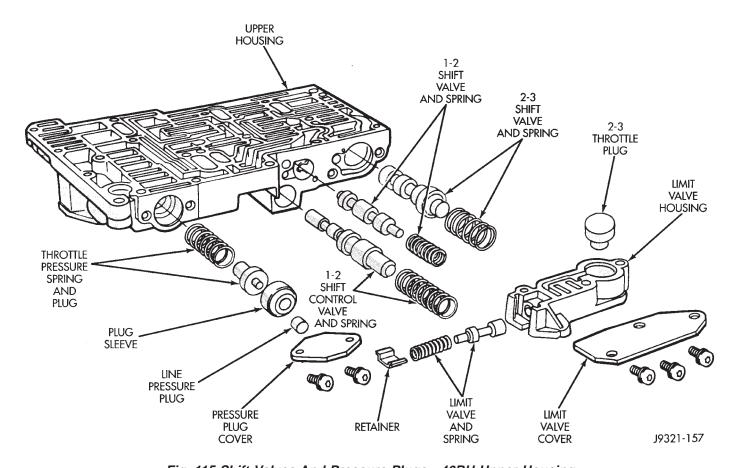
Shift Valves And Pressure Plugs—46RH Upper Housing
